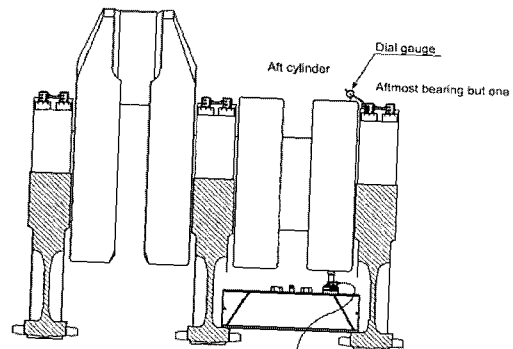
Jack-up measurement of bearing reactions inside diesel engine
